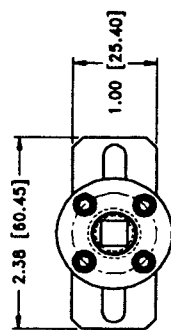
PBPM KINEMATIC MOUNT V ASSEMBLY
